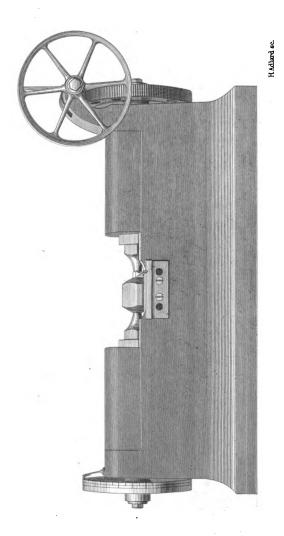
PERSPECTIVE VIEW OF WHITWORTH'S MILLIONTH MEASURING MACHINE.
